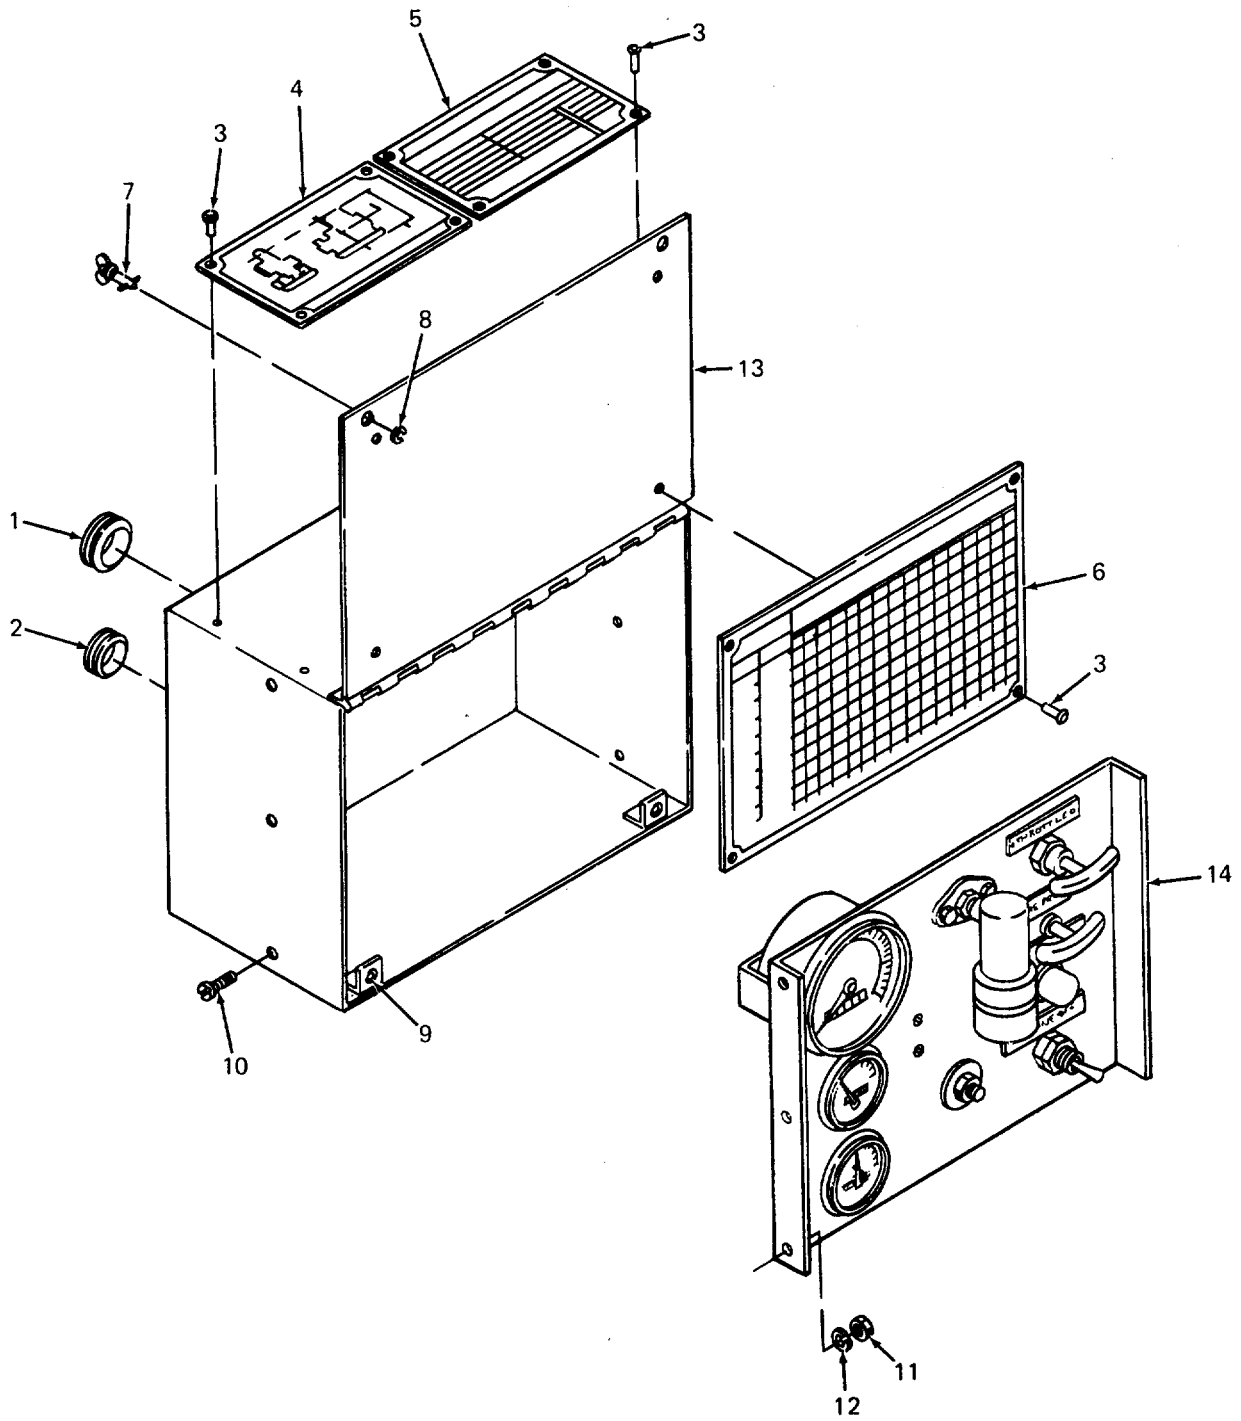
Control Panel Cover Assembly (Sheet 1 of 2)
